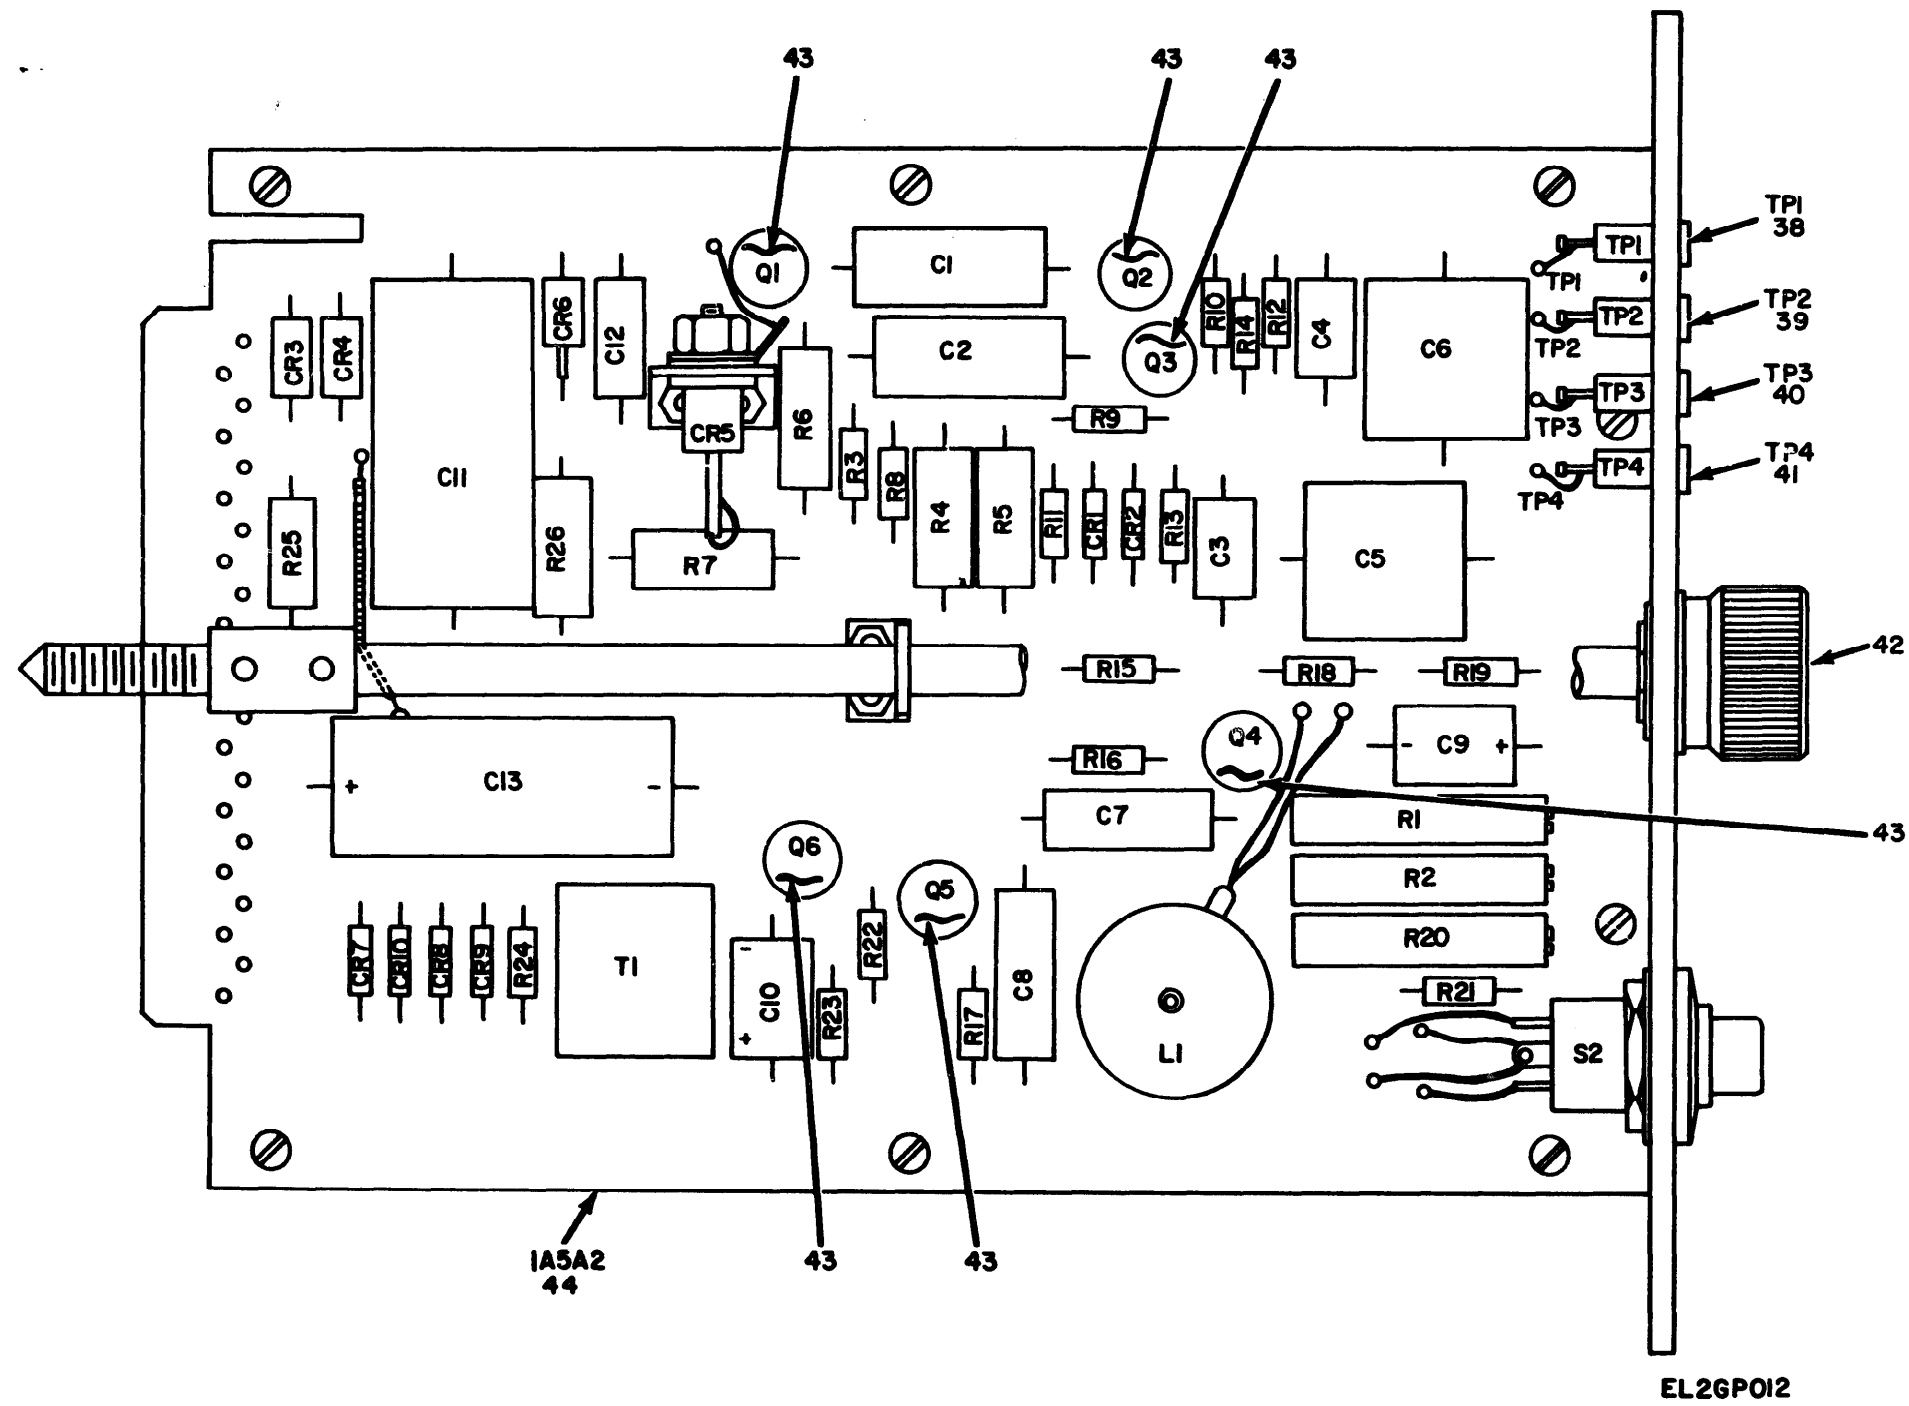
Ring Receive Module Assembly IA5, Ring Send Subassembly IA5A2.
